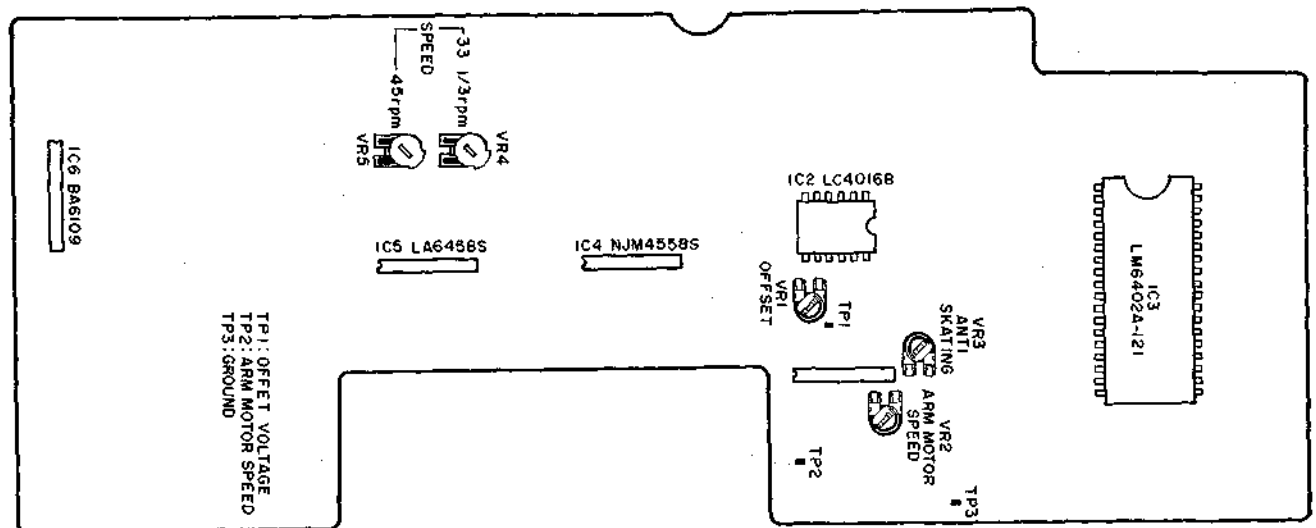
Servo/System Control P.C Board Adjustment Points
